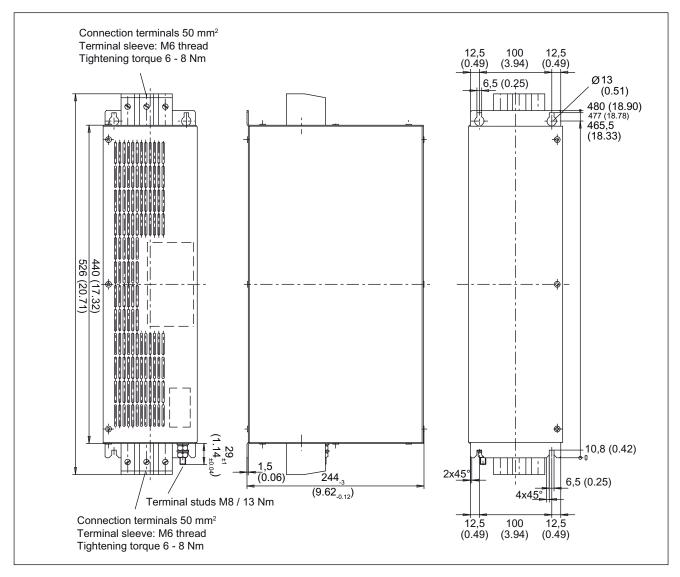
Dimension drawing of Wideband Line Filter 36 kW for Active Lines Modules, all dimensions in mm and (inches)
